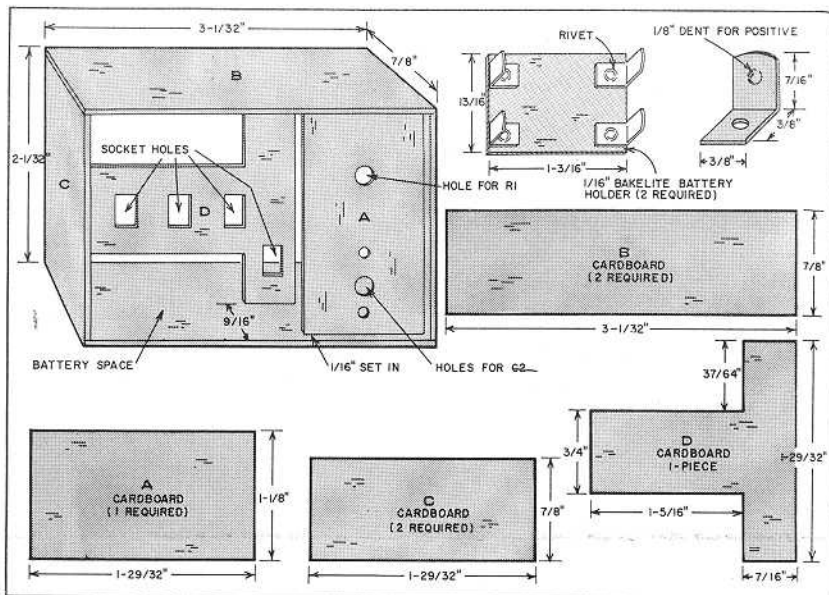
Chassis assembly for the flip-top radio. If you use the printed-circuit board, only parts C and B are needed.
